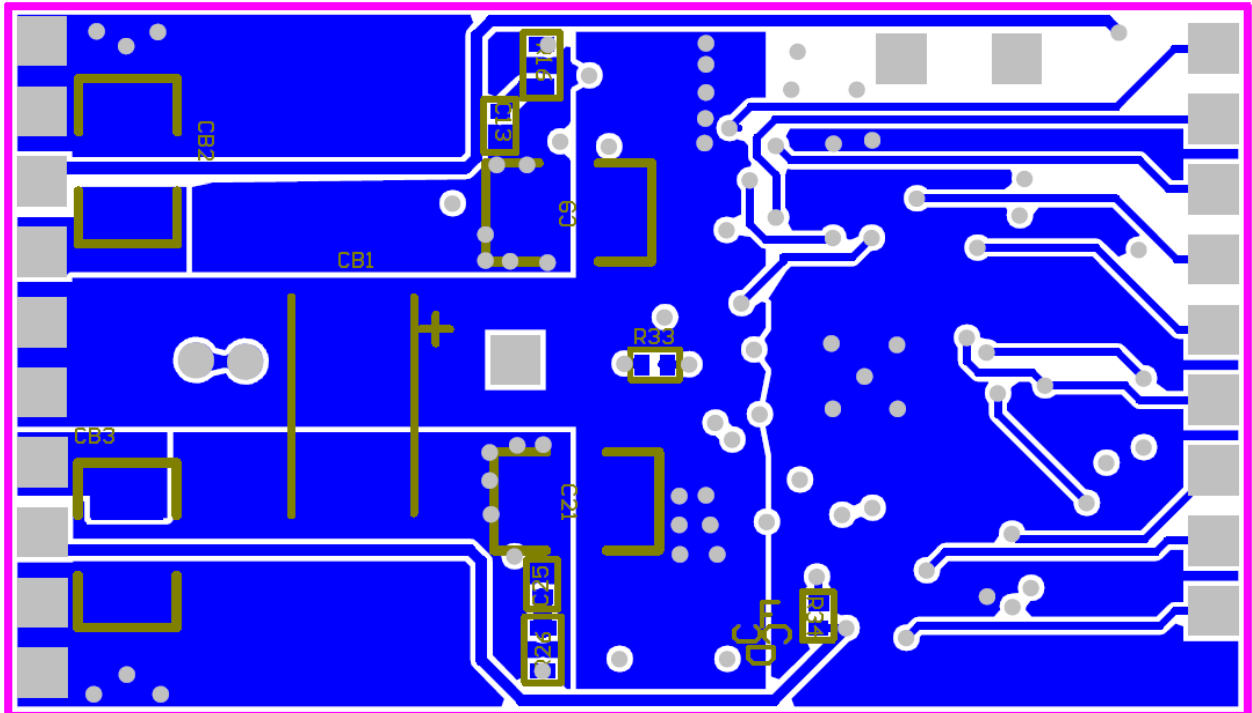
Bottom Assembly Drawing for 1829 Evaluation Board (flipped horizontally)
